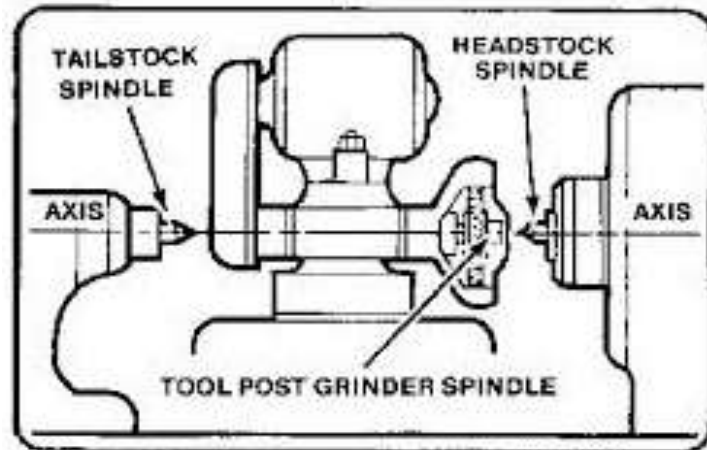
Block diagram of outside Diameter Cylindrical Grinding [44]
